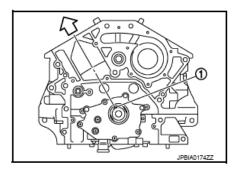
Identifying Crankshaft Key Courtesy of NISSAN NORTH AMERICA, INC.
